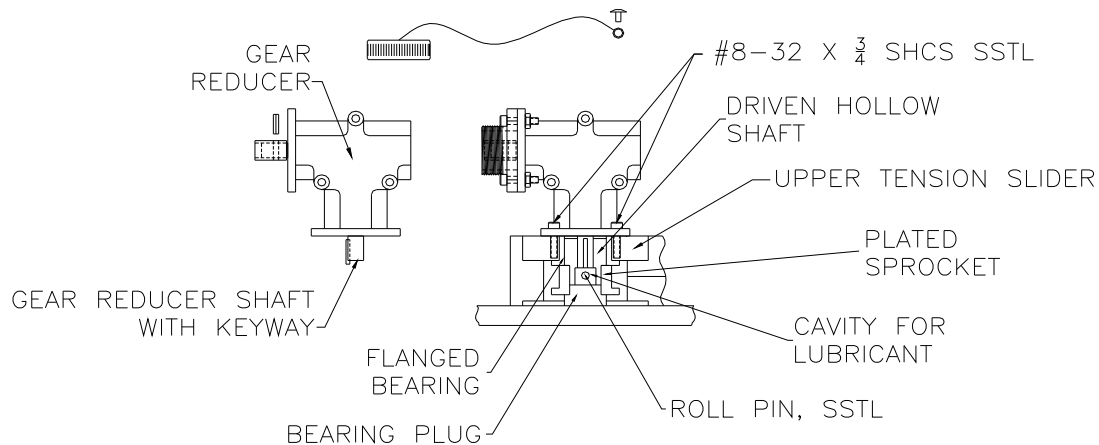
, Manual Crank Input Gear Box Assembly
